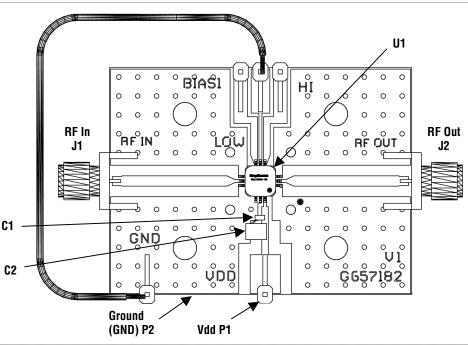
Layout and Assembly of Test Evaluation Board (RMLA3565-58-TB)
